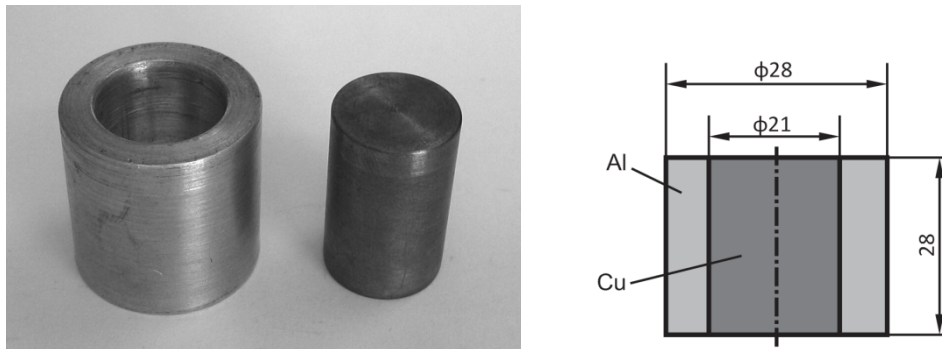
Photograph of aluminium sleeve and copper core and dimensions of composed billet
